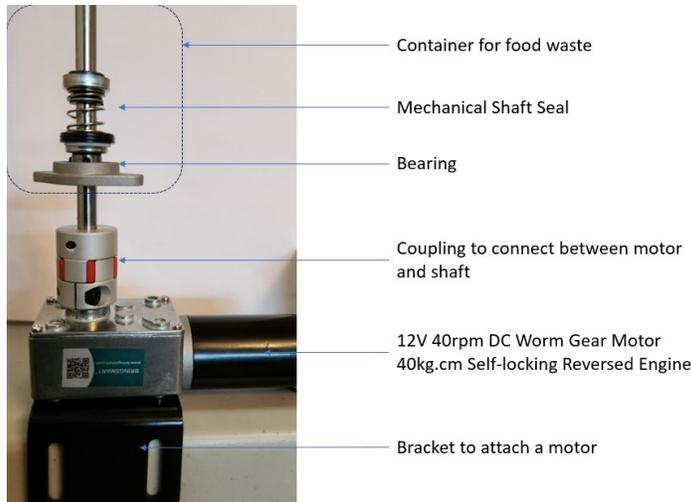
Module of the Motor, Coupling, Bearing, Shielding, and the 8mm Shaft
